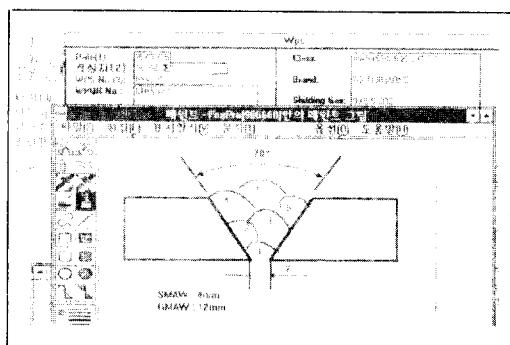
An example of detail welding pass with Paintbrush
